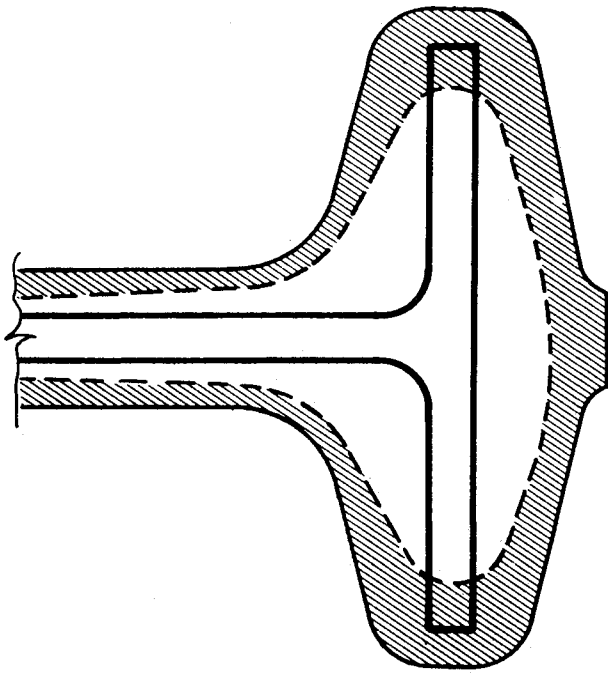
Cross section of a die forging. The contours of the machined part are shown, as well as the assumed boundary between compressive and tensile residual stresses before milling.
